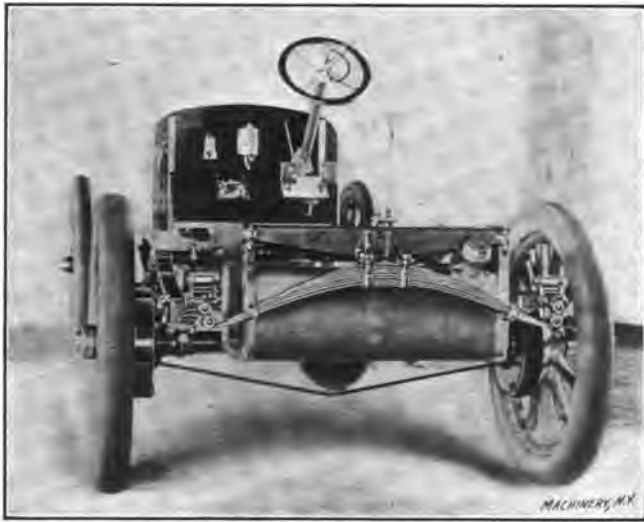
Spring Support of the Losler Motor Co.'s "Light Six" Car
